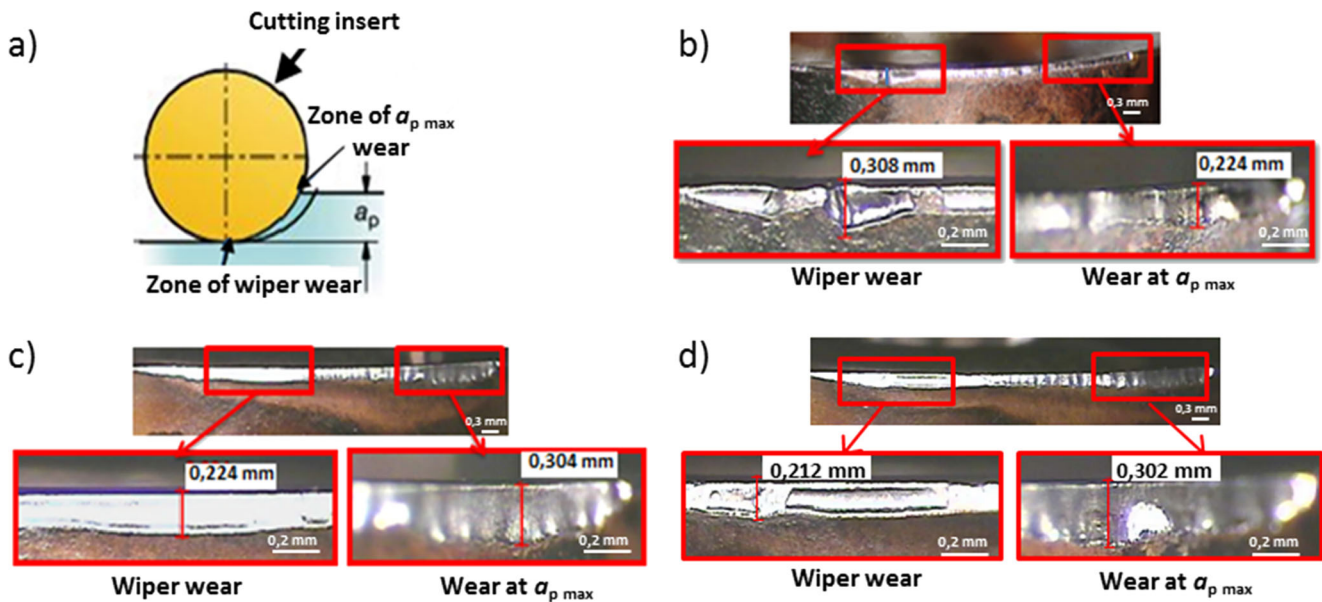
a Zones of wear on a round cutting insert; flank wear at the end of tool life under optical microscope after b dry machining, c machining with MQL applied to rake face, and d machining with MQL applied to flank face
